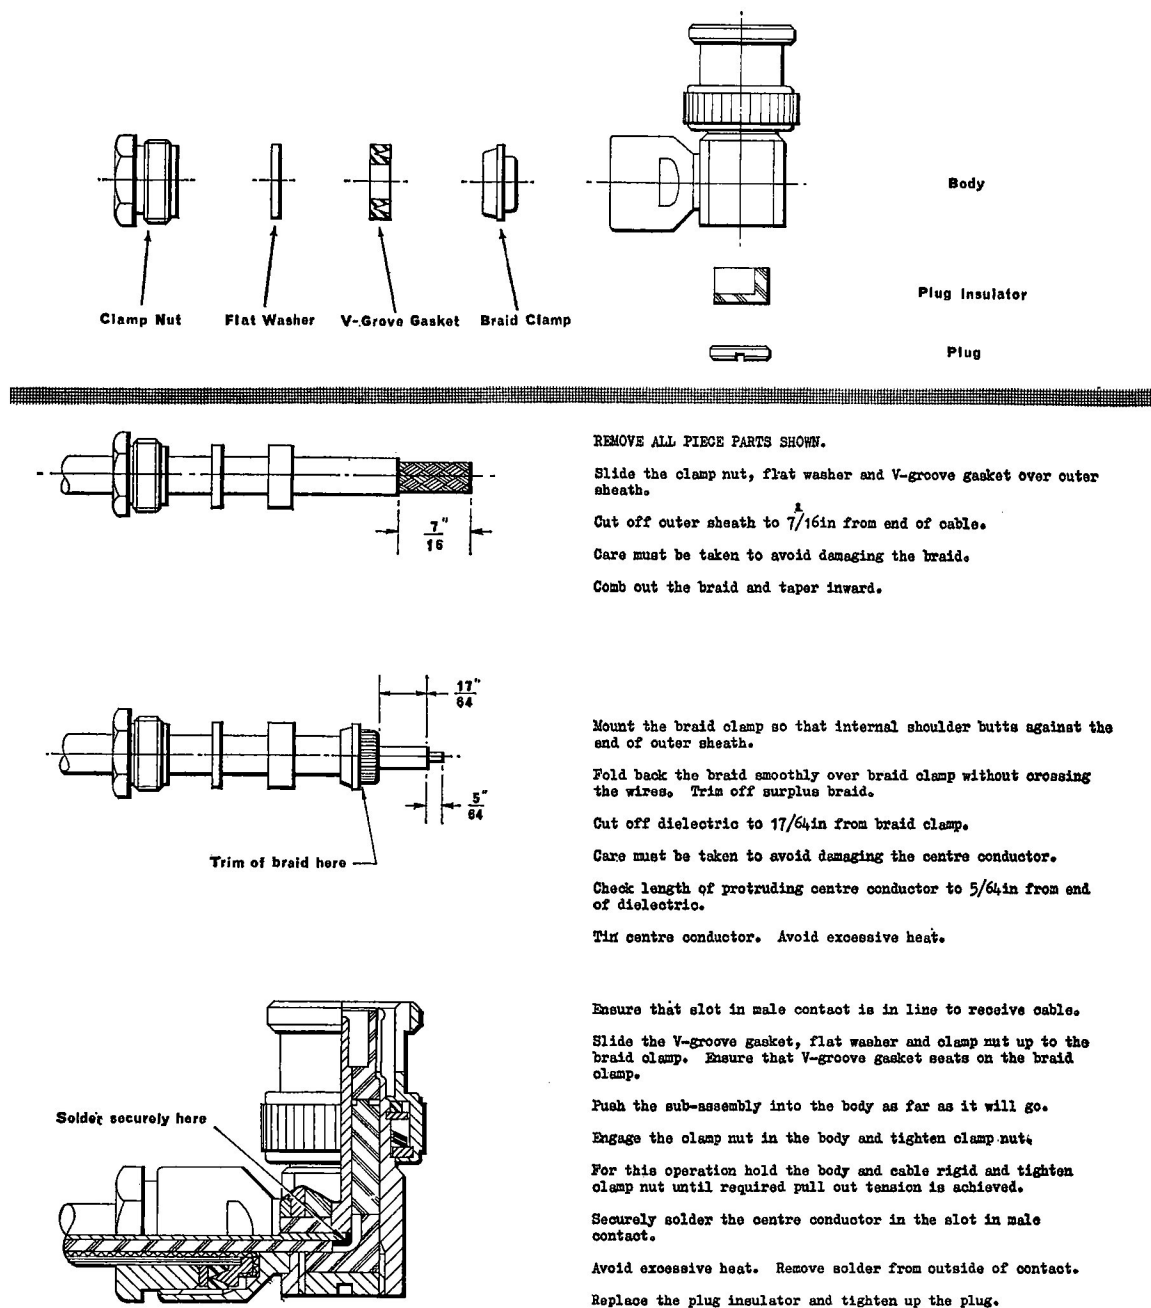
E—Assembly instructions—BNC Type plugs and sockets—Elbow plugs improved braid clamp
